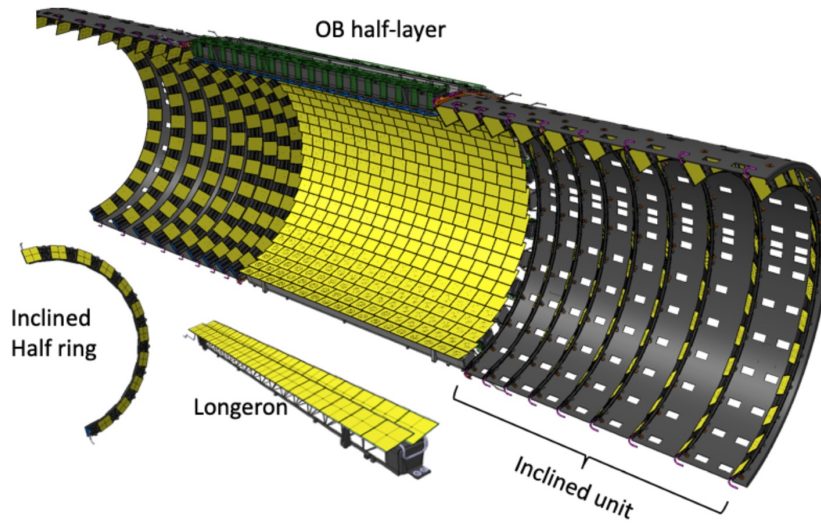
The LS for the OB and a view of the OB half-layer [23].
